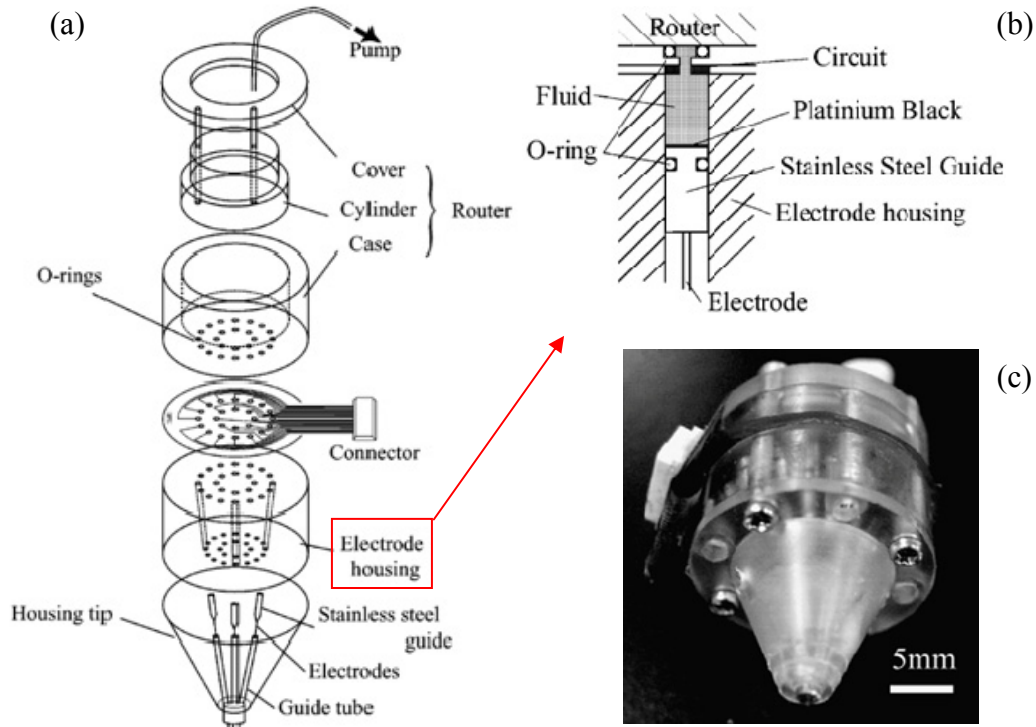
Assembly for an electrode array with hydraulic positioning [45]. a) Full schematics of the device. b) Close-up on the fluid and piston system inside each channel in the electrode housing. c) Picture of the assembled device.
